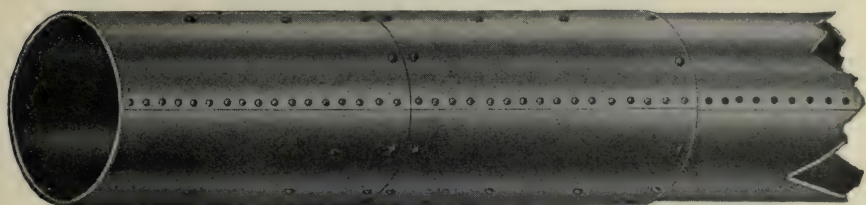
RIVETED STEEL DOUBLE WELL CASING
